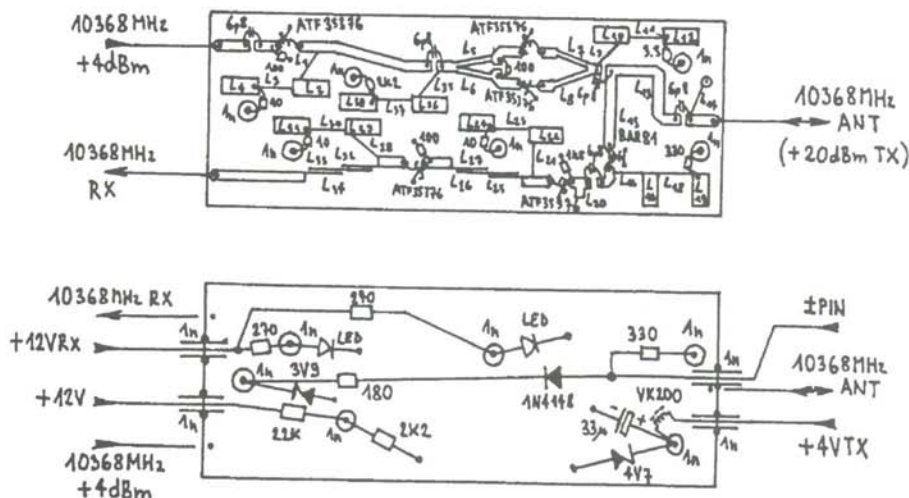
10368MHz RF front-end PCB (0.5mm PTFE)
